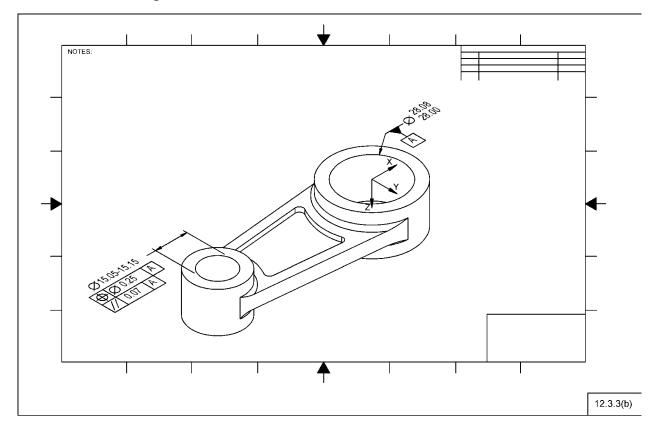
Axonometric Views – Parallel Planes Tolerance Zone
